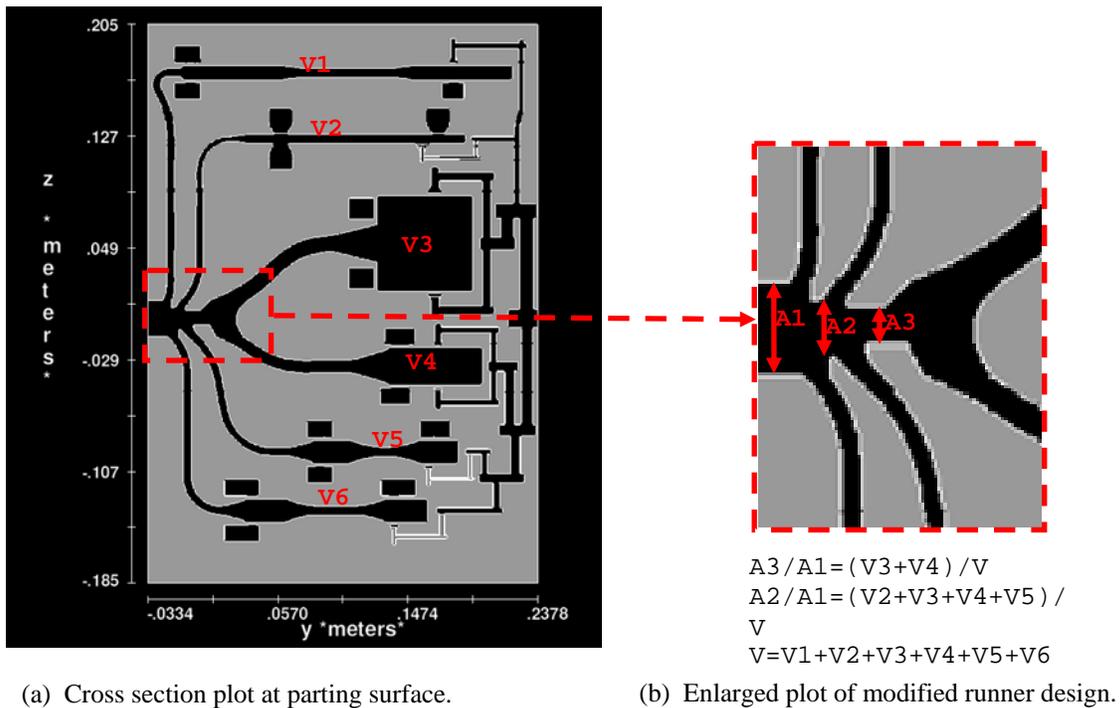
Cross section at parting surface of ejector insert for modified runner design.
